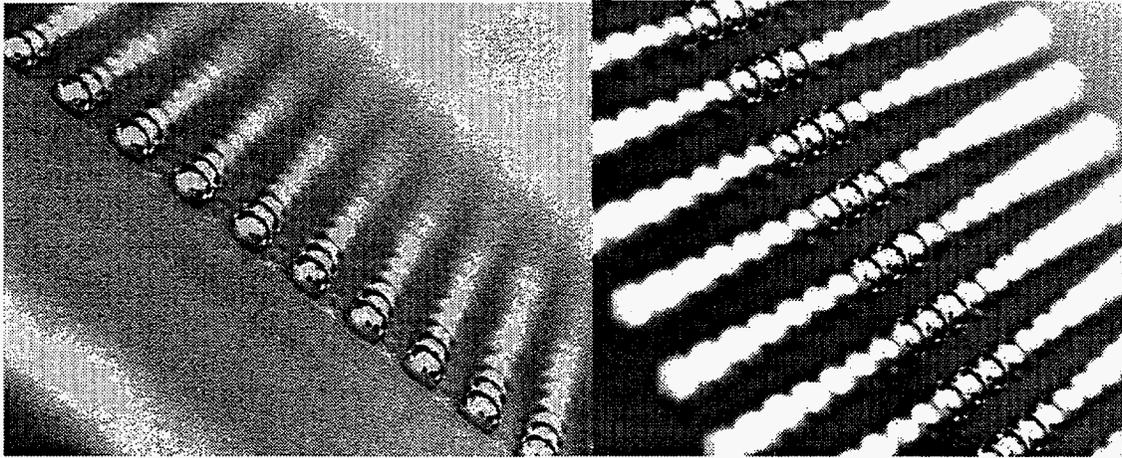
Photographs of pc board with 20x20 array of .030" wetted solder balls deposited simultaneously by solder jetter.
